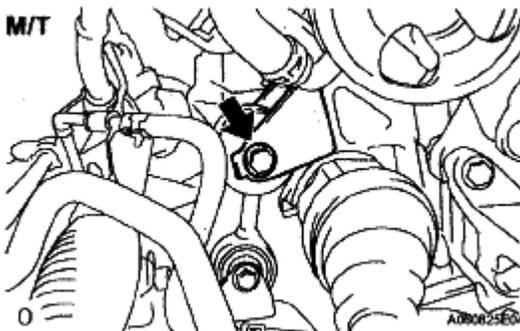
Locating Bolt From Engine Lateral Control Rod
